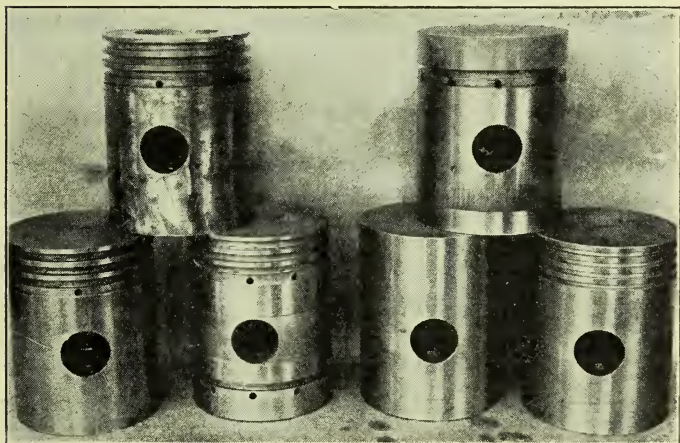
SEVERAL TYPES OF PISTON INSTALLED DURING THE TESTS
